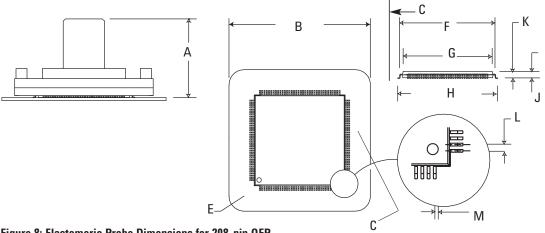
Elastomeric Probe Dimensions for 208-pin QFP
